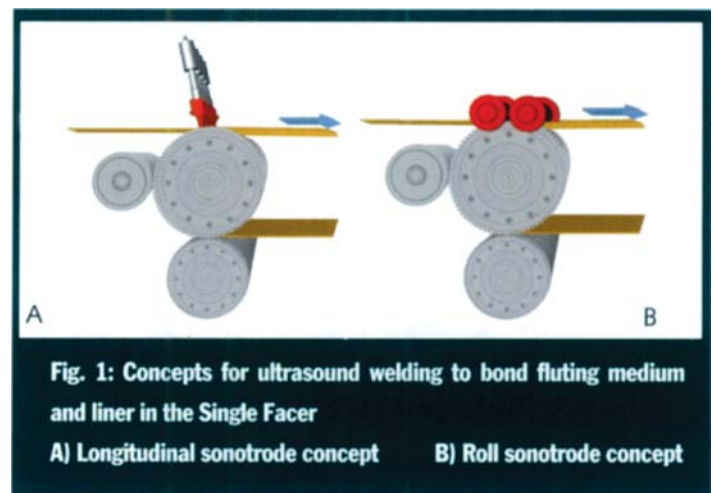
Concepts for ultrasonic welding to bond fluting medium and liner in the Single Facer
